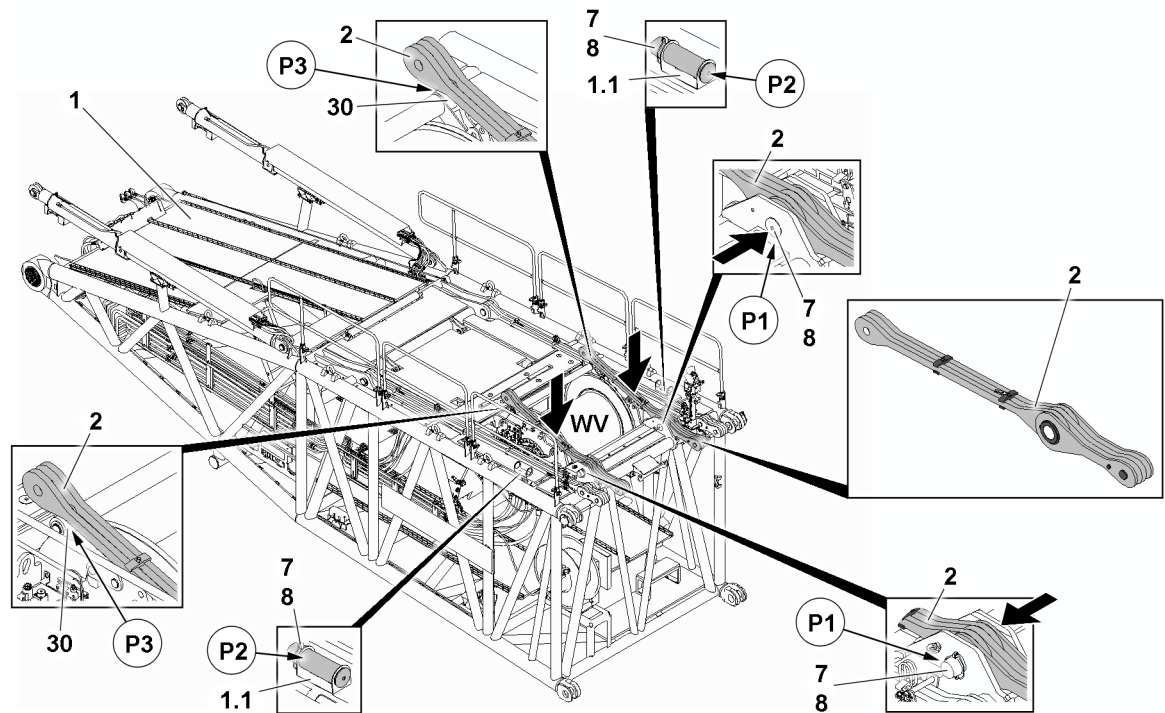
Assembling the H-guy rods on the H-pivot section 1
